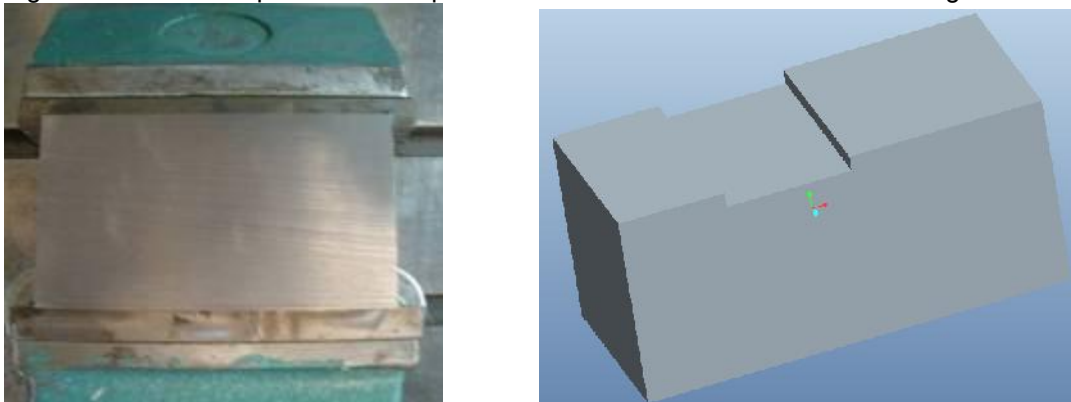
Fixed sample (left) and its virtual model with milled groove
